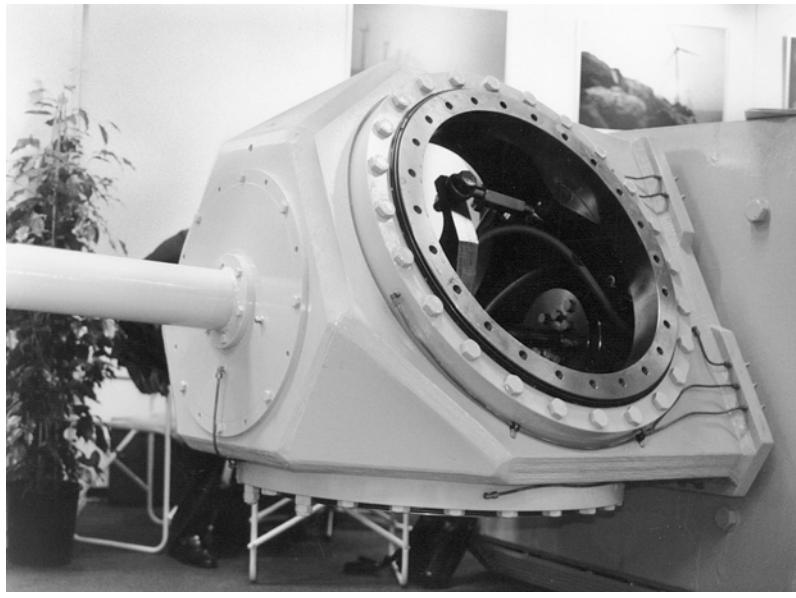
Rotor hub made of welded steel sheets in a small Windmaster 300 turbine
